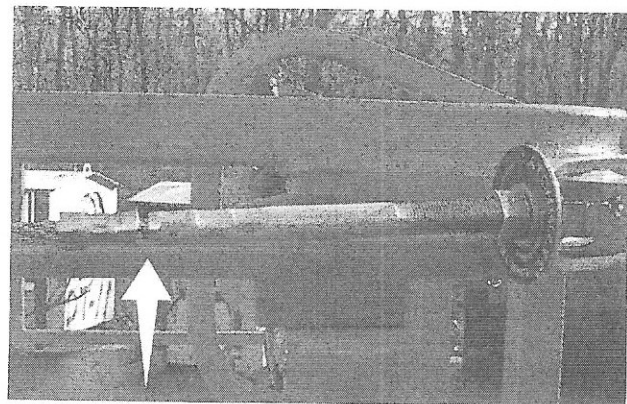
Slip Indicator - Remove From Service (Transfastener Type only)
